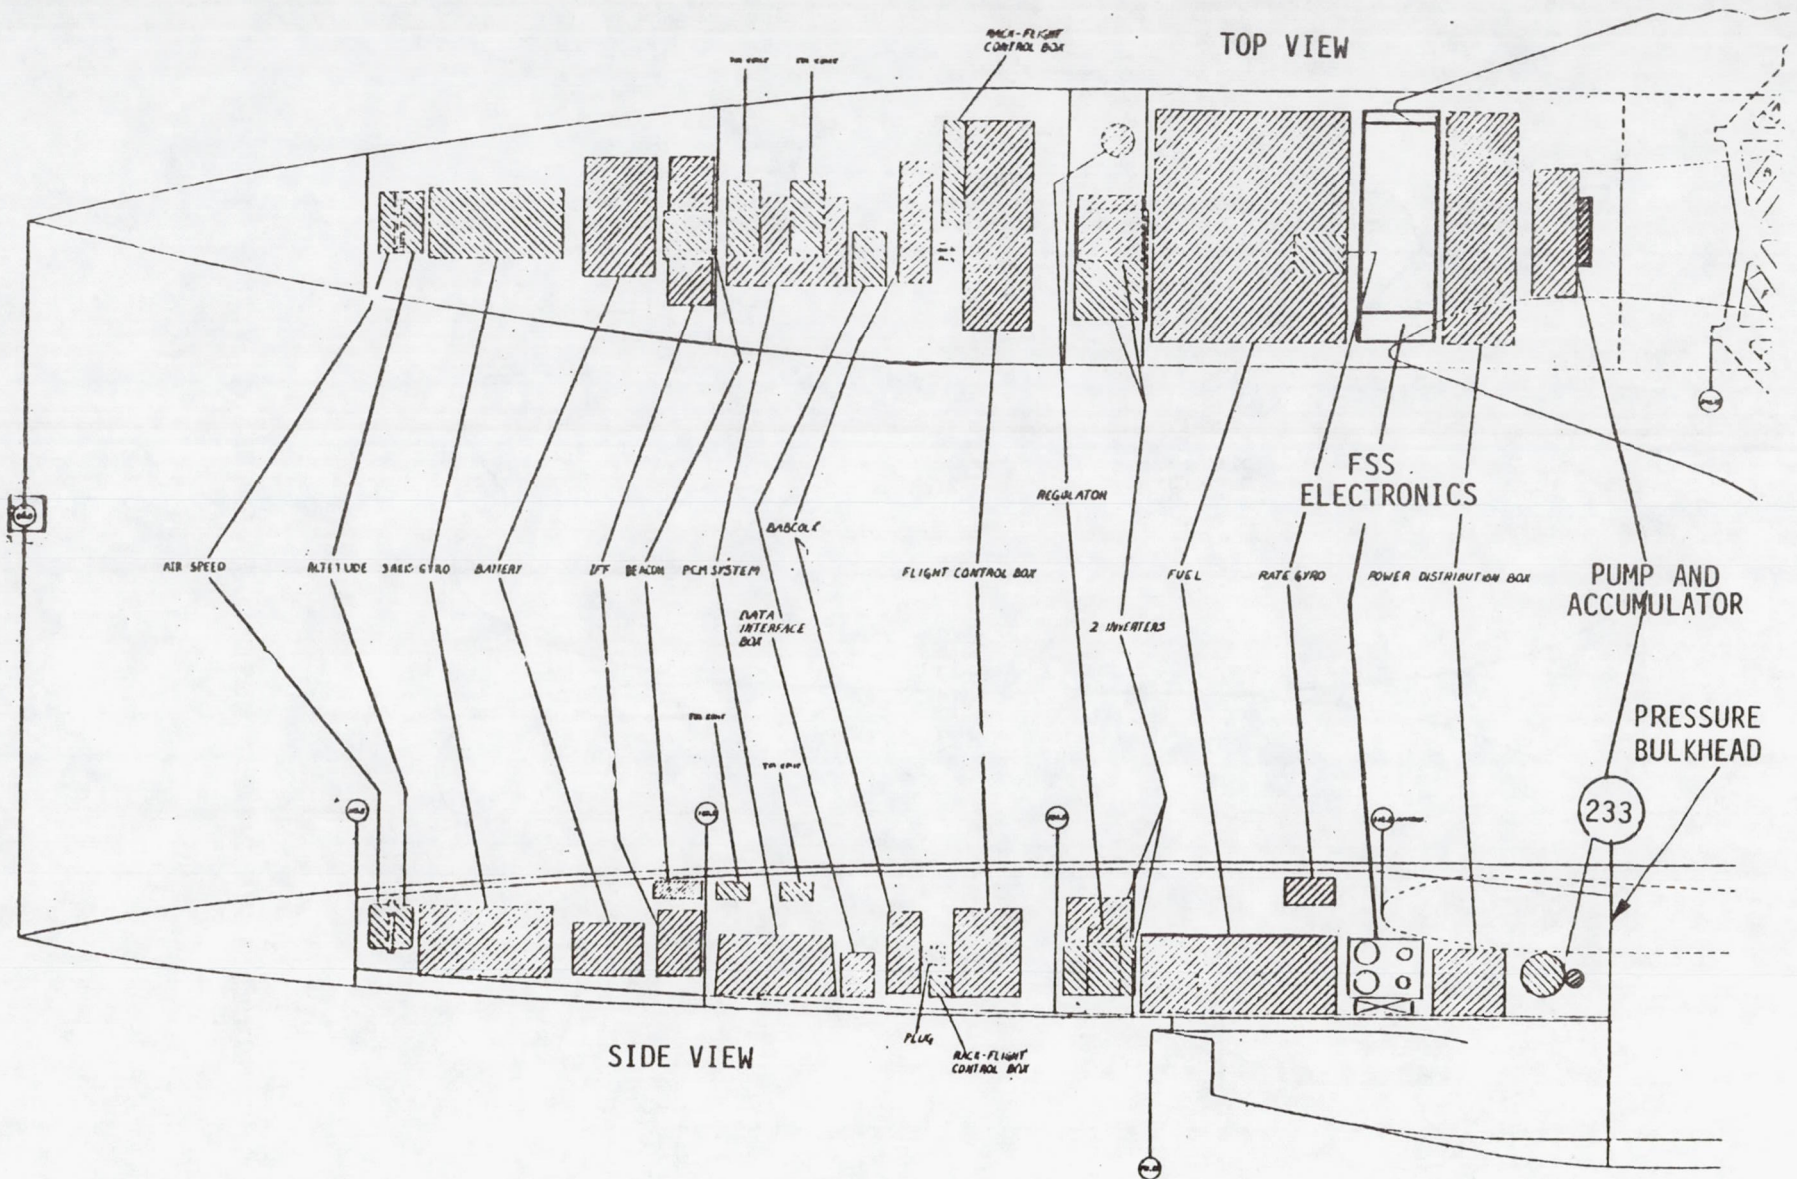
ON-BOARD EQUIPMENT LAYOUT
